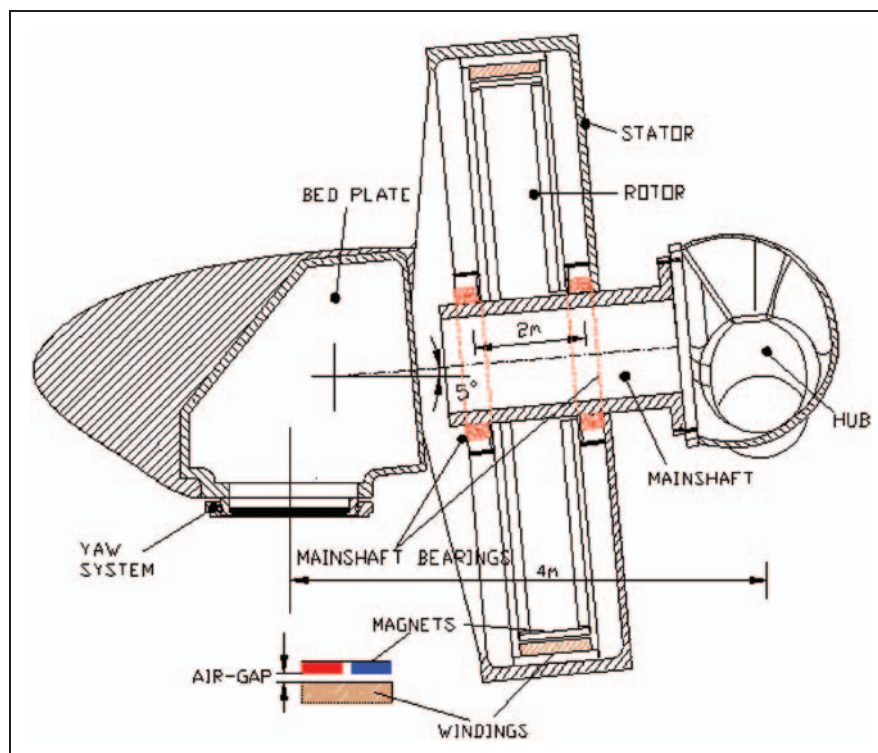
Rotor nacelle assembly of a direct-drive generator.
